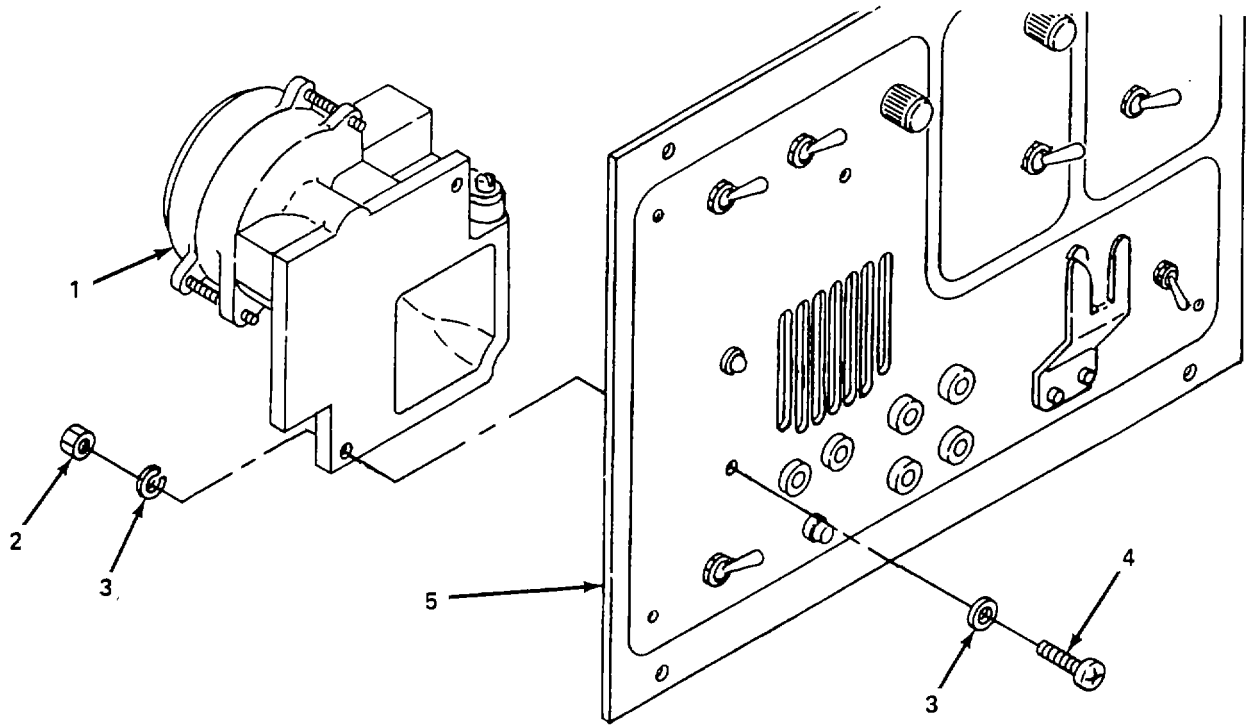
Front Panel Chassis Assembly Power Speaker Assembly, Replace.
